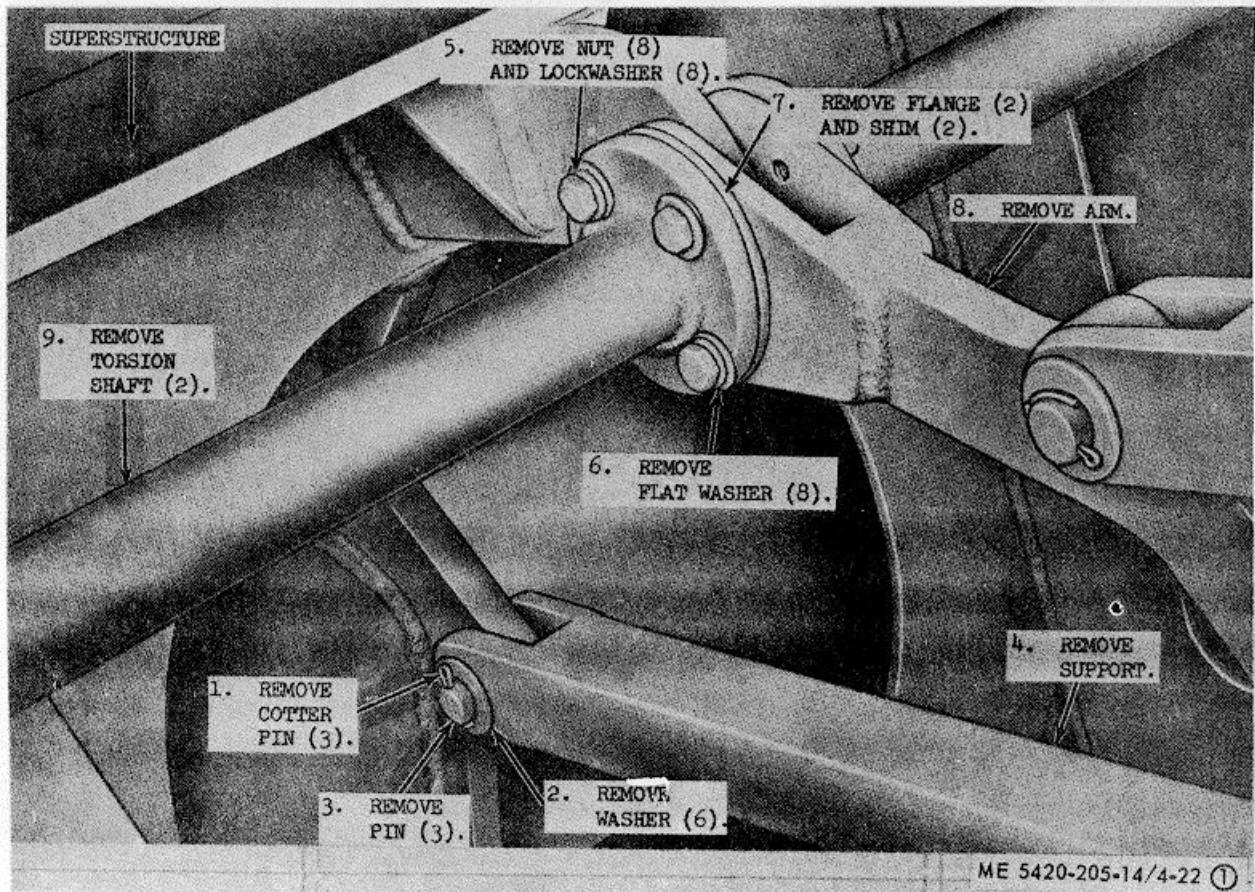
Curbing and torsion shaft, and ramp bracket, removal and installation (sheet 1 of 3)
